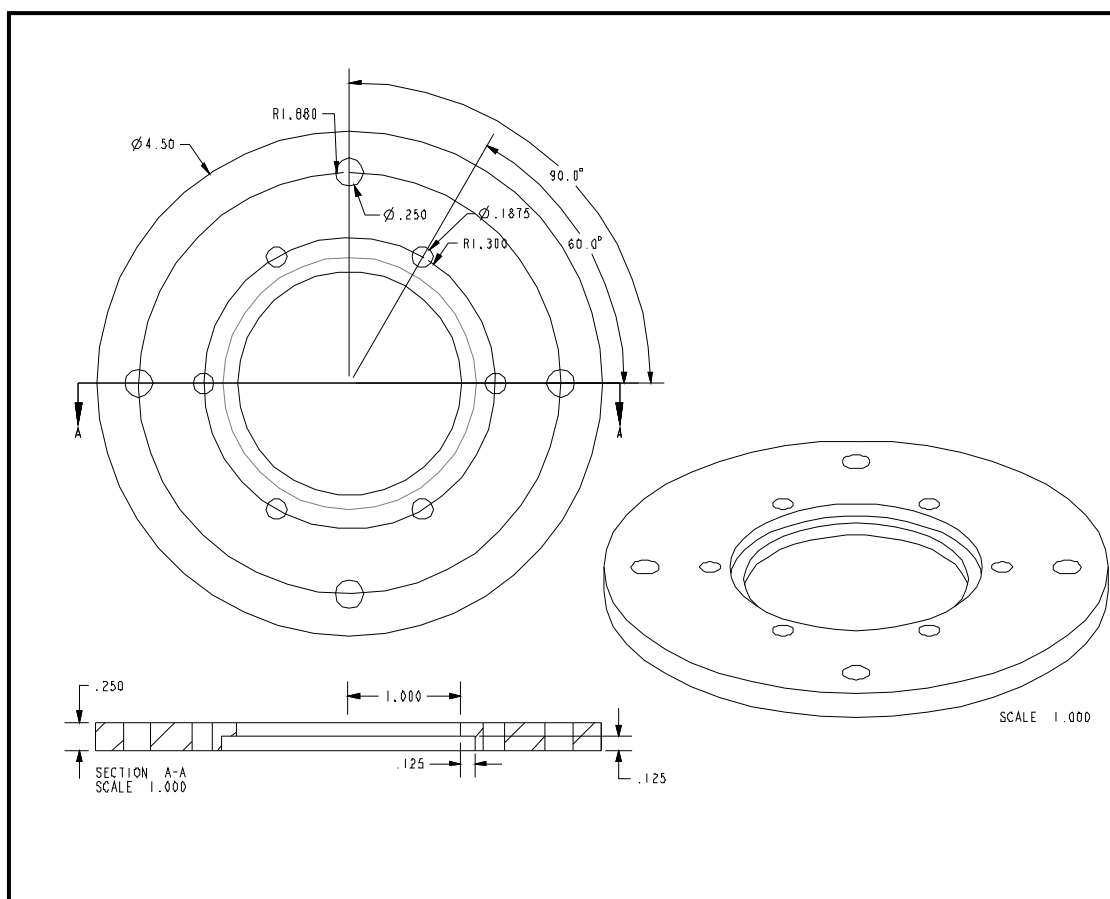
CAD Drawing of the 2nd Generation Injector – JSR Interface and Top Flange (Filename: secondflange.drw).
